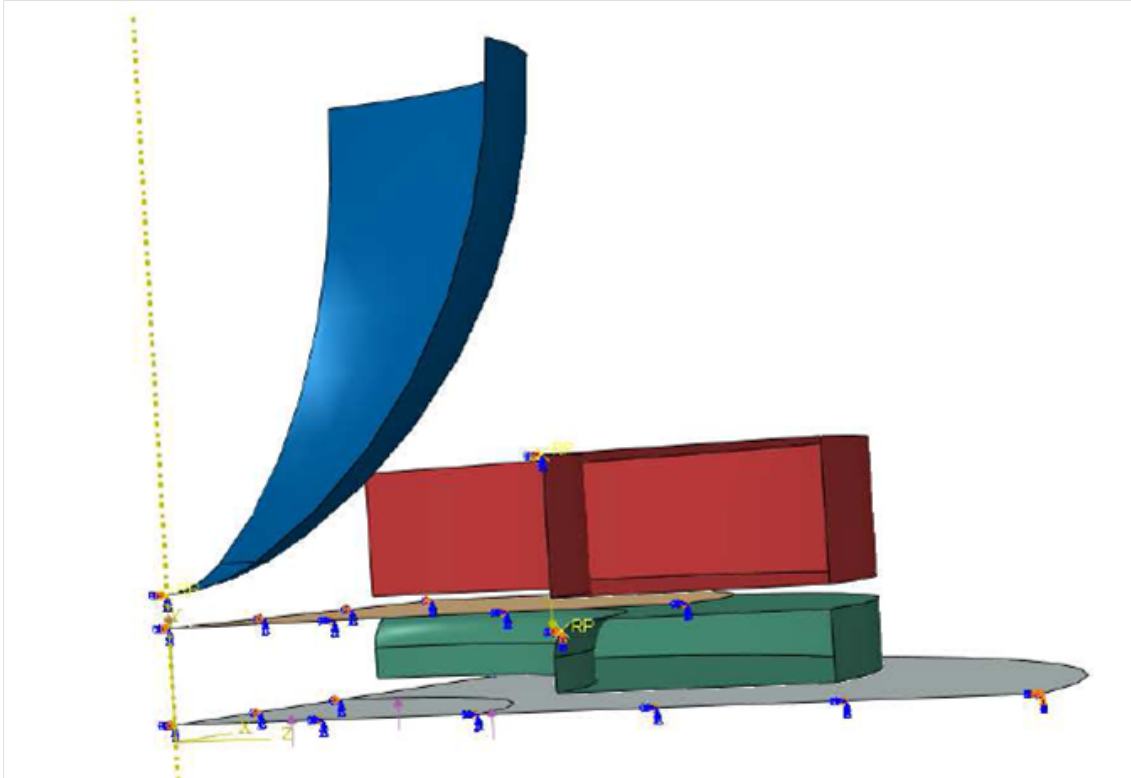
Assembly of rubber assisted sheet Hydro-forming
